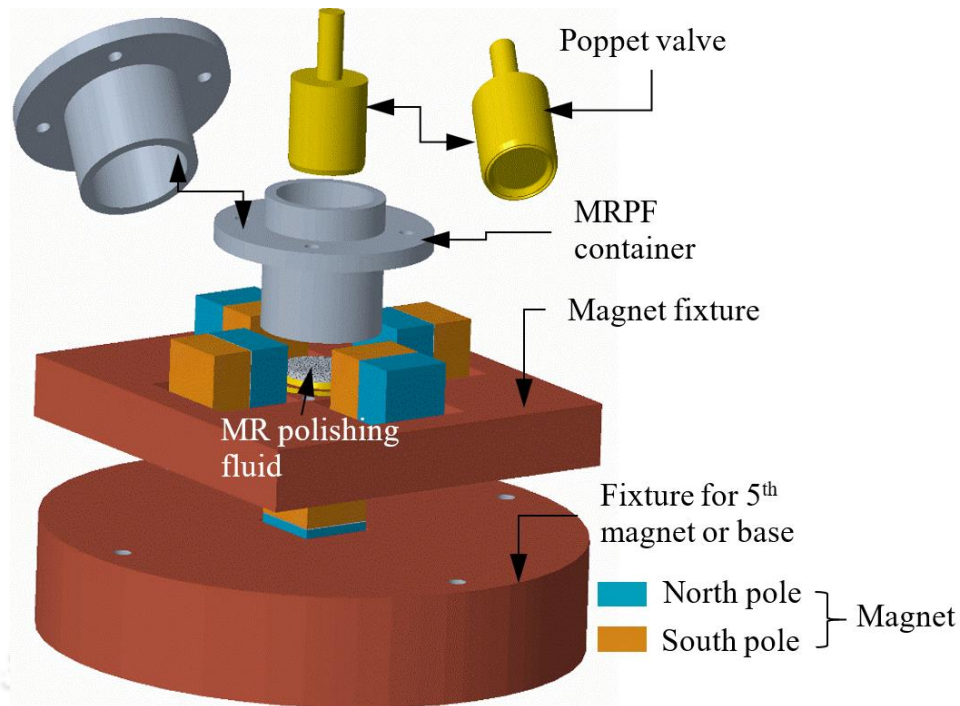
Schematic diagram of magnet fixture assembly for poppet valve polishing
